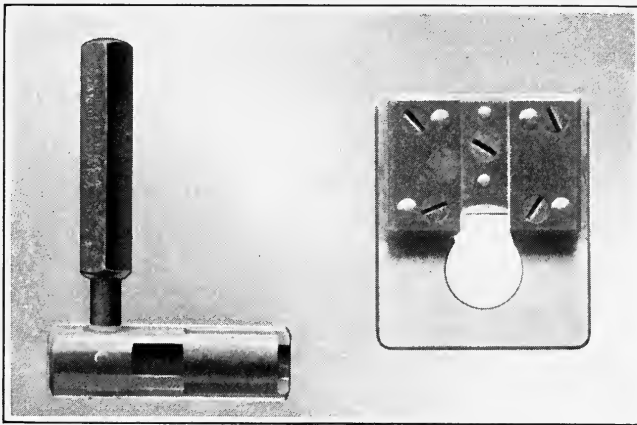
Gage for testing a Composite Surface, and Reference Gage employed in its Checking
